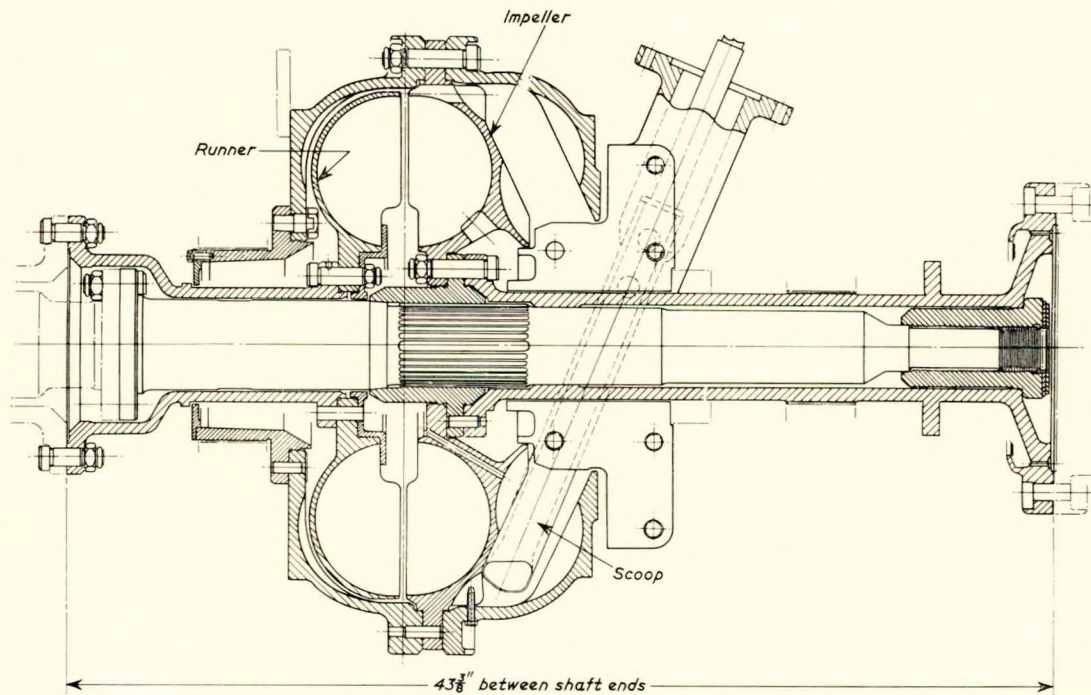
Ahead hydraulic coupling—Sectional arrangement
